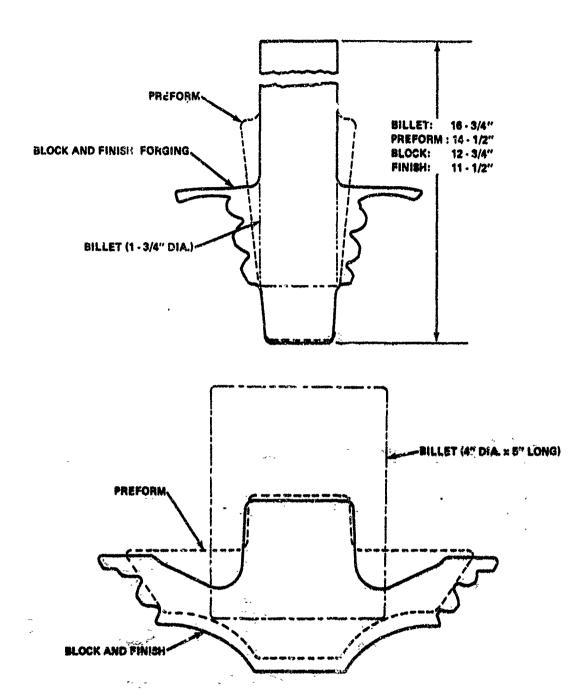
Cross-sectional Representations of the Spiral Bevel Gear and Pinion from Billat to Finish Forging
